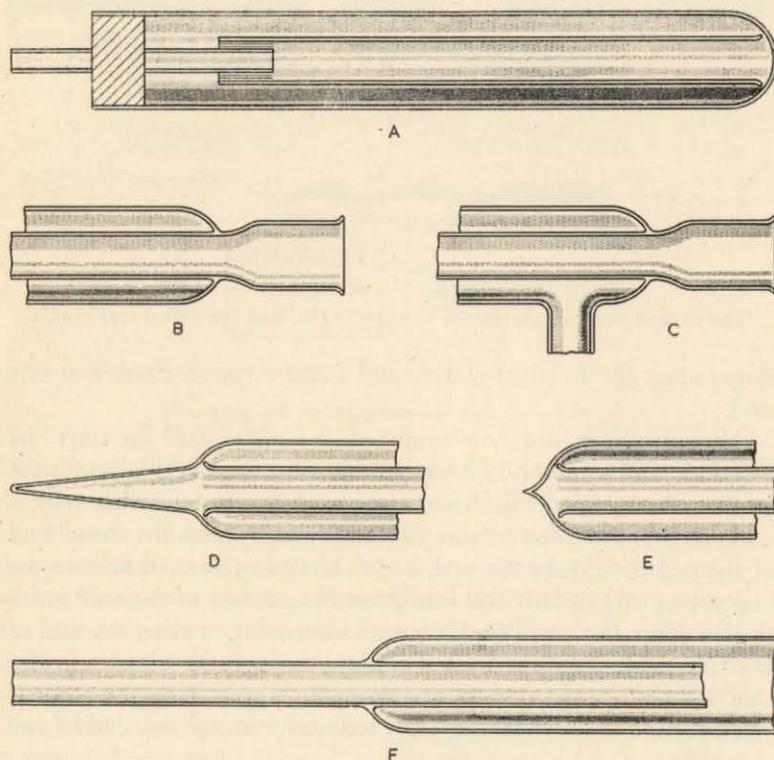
STAGES IN THE ASSEMBLY AND JOINING OF A LEIBIG CONDENSER
